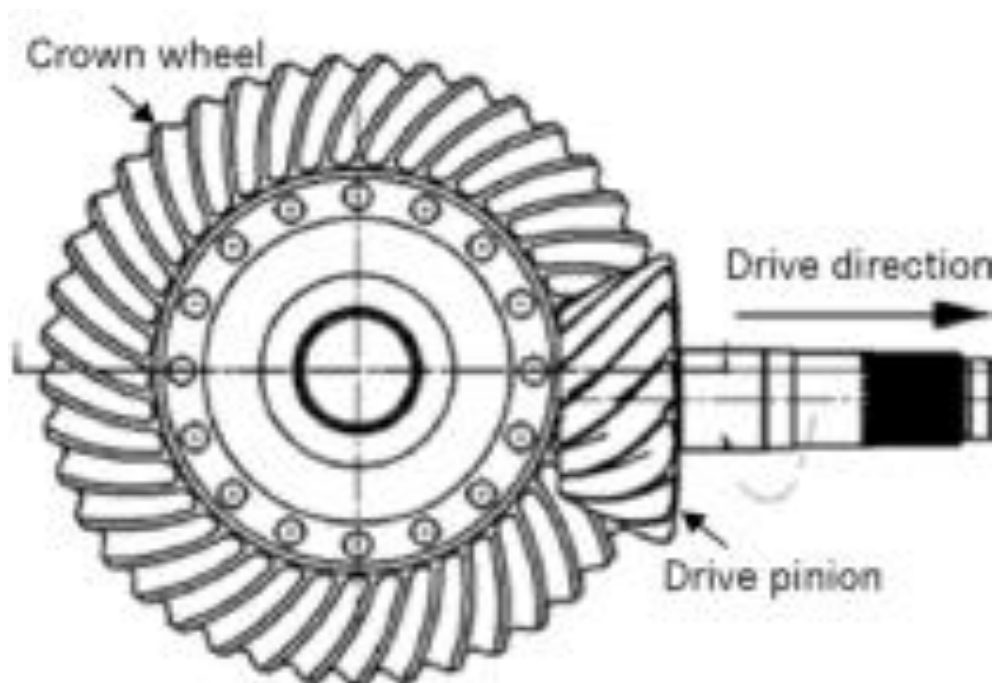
Spiral toothed bevel gears with hypoid intersection between drive pinion and crown wheel axes
